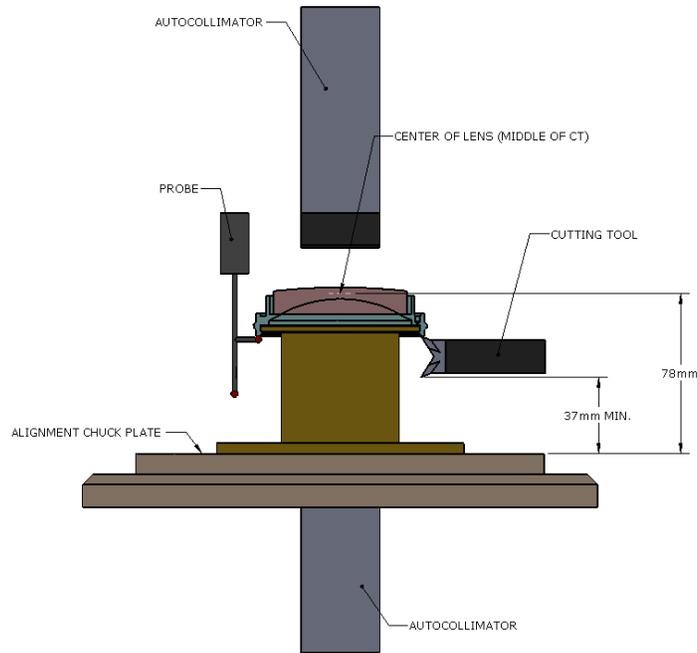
Illustration of typical workpiece setup showing geometric design constraints
